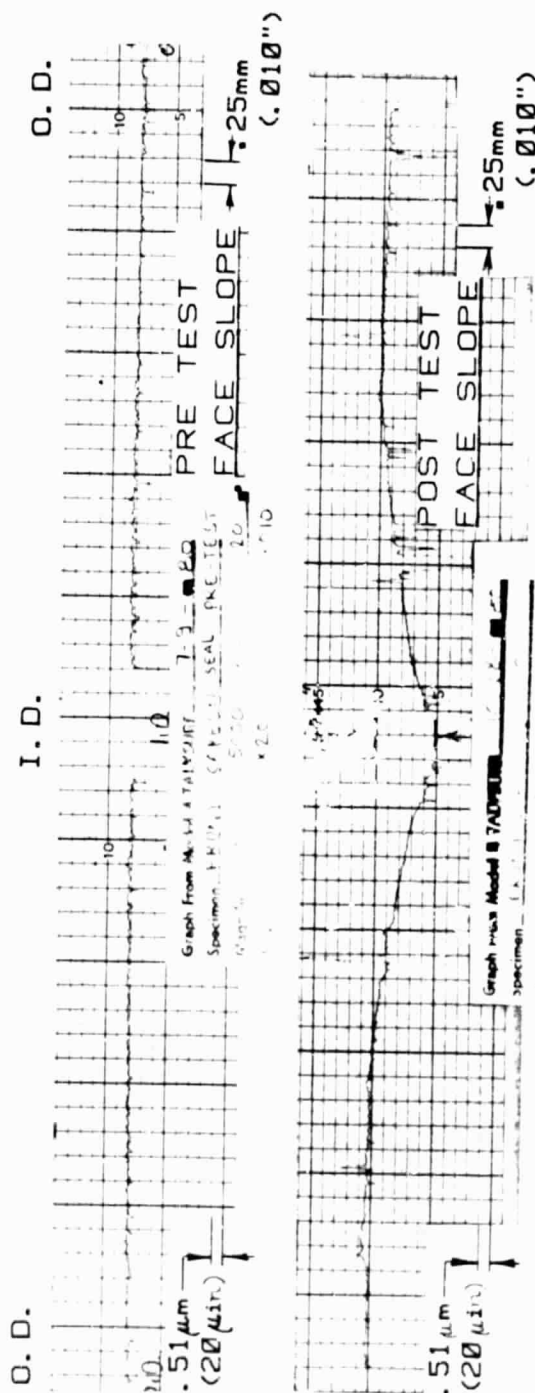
PROFILE TRACES OF THE PRIMARY RING USED IN THE TEST WITH THE STANDARD FLAT FACE PUSHER TYPE 8B SEAL BALANCED TO 76.3%
